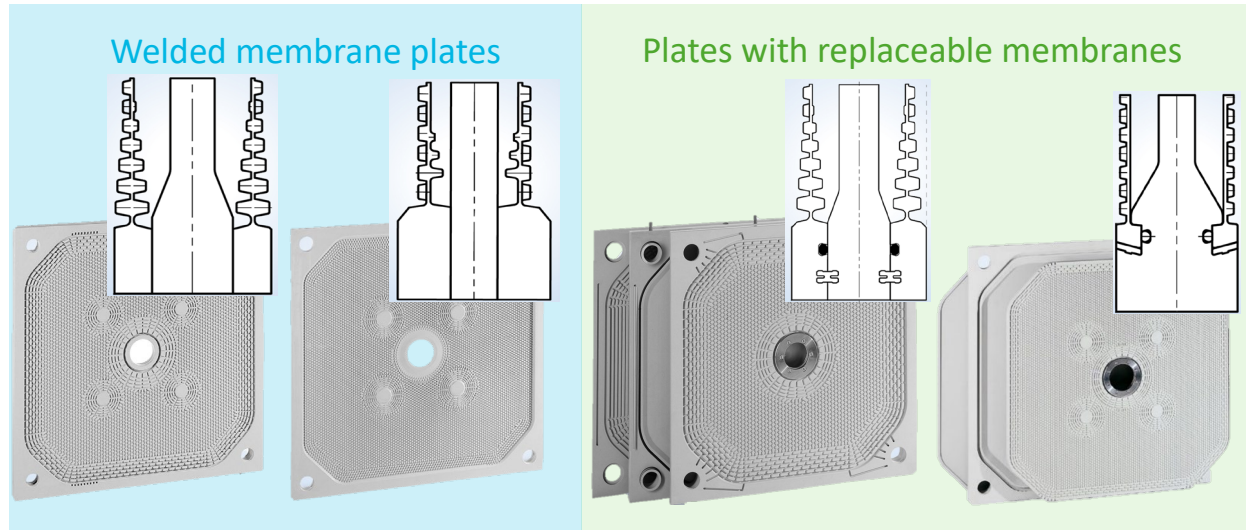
Different types of welded and replaceable membrane filter plates
